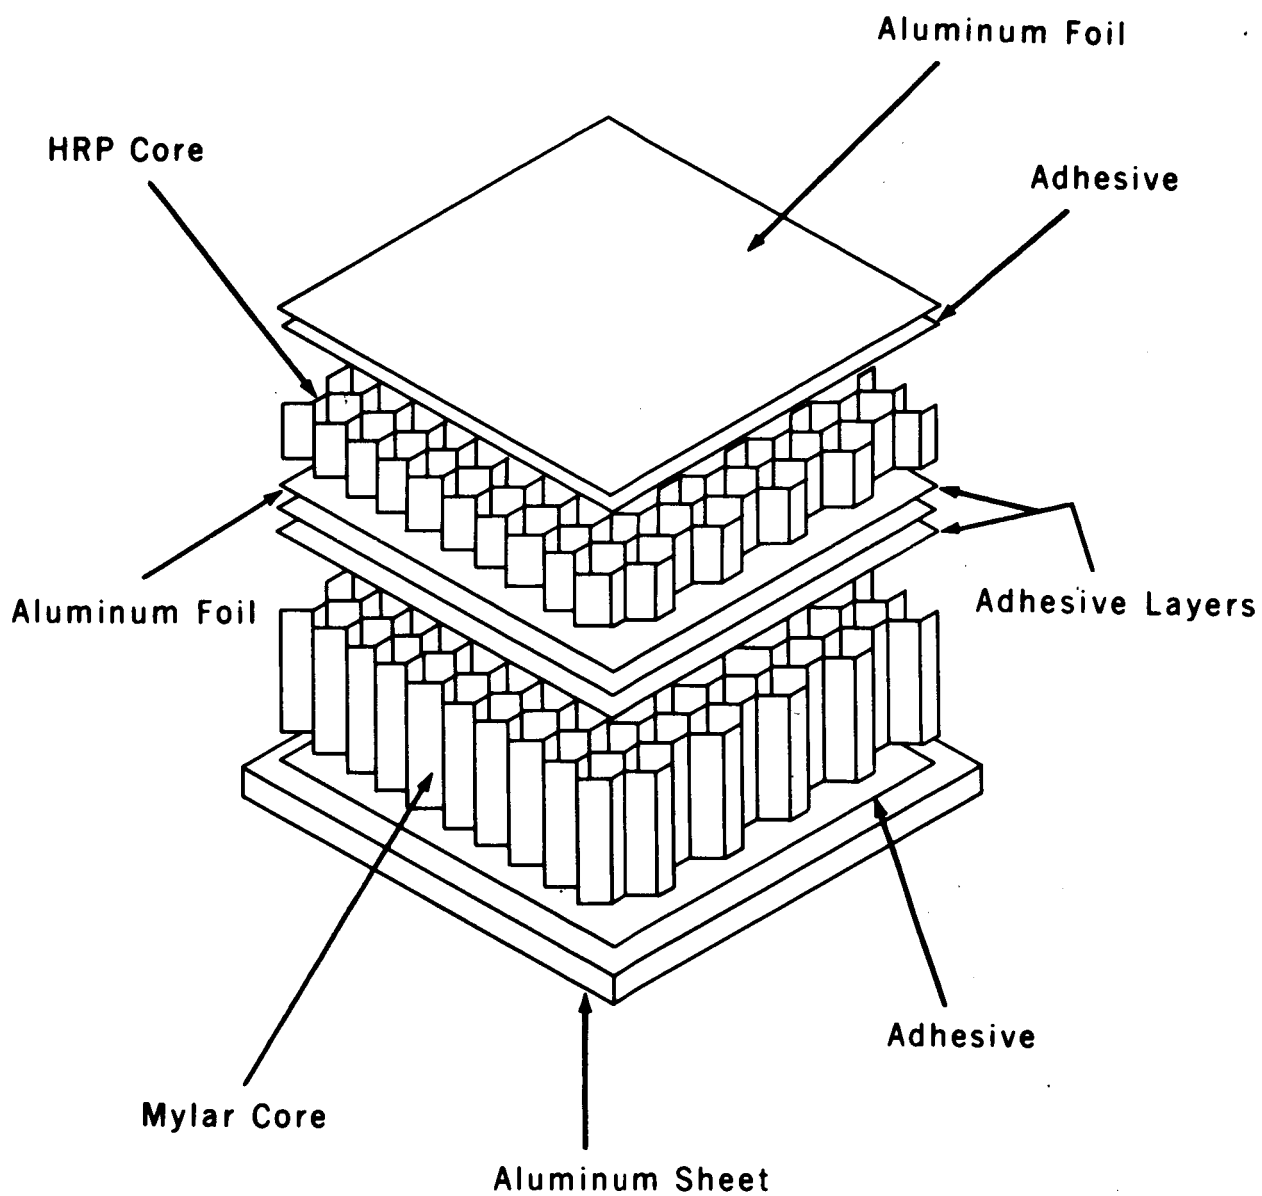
DESIGN OF DUAL SEAL INSULATION
